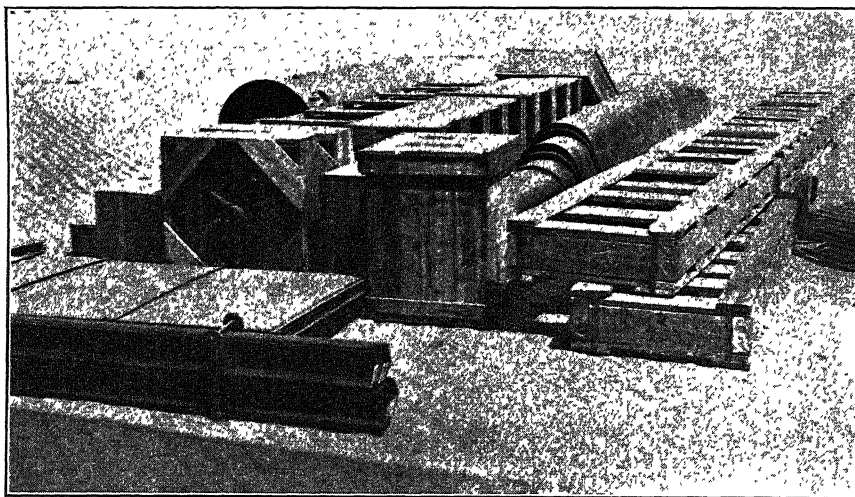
Miscellaneous material packed for export: on the right, locomotive frames crated; next, scroll-conveyor troughs nested for shipment; next, scrolls for same crated; on the left, a small vertical boiler, head has a wooden protector bolted on; in front, angles and plates (stock material) nested and bolted together; behind them, a C. I. pulley crated.
